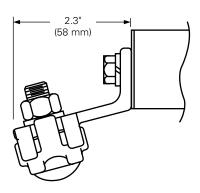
Large parallel-groove terminal (250 MCM) (-N)
